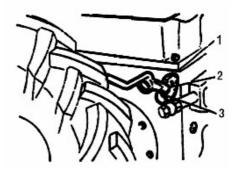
Control of PTO shaft 1-high speed 2-neutral gear 3- low speed
